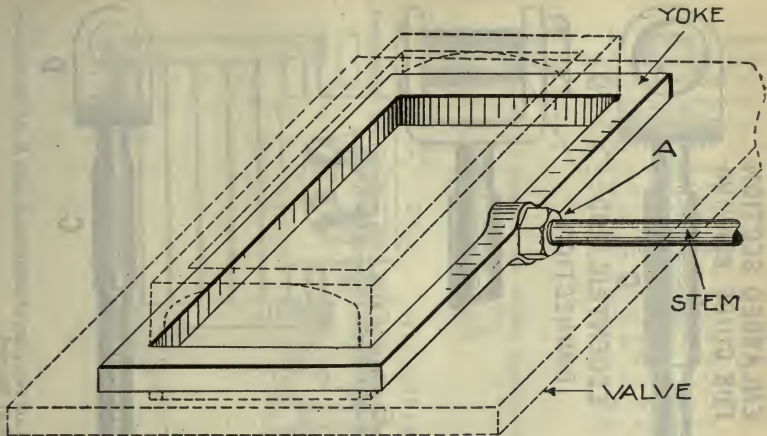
The valve yoke, or rectangular frame which embraces the box shaped section of the valve, and to which the valve stem is attached. The valve is shown in dotted lines to indicate the position of the yoke.
